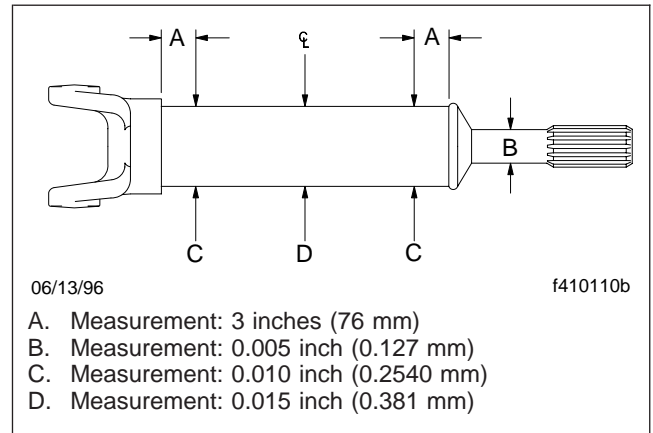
, Runout Specifications for a Rebuilt (or New) Driveshaft
